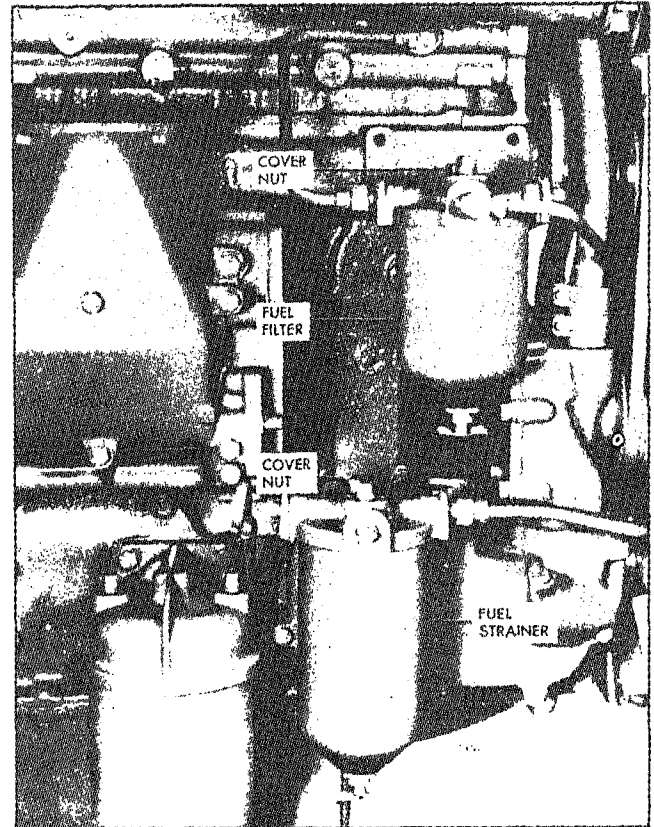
Typical Fuel Strainer and Filter Mounting
